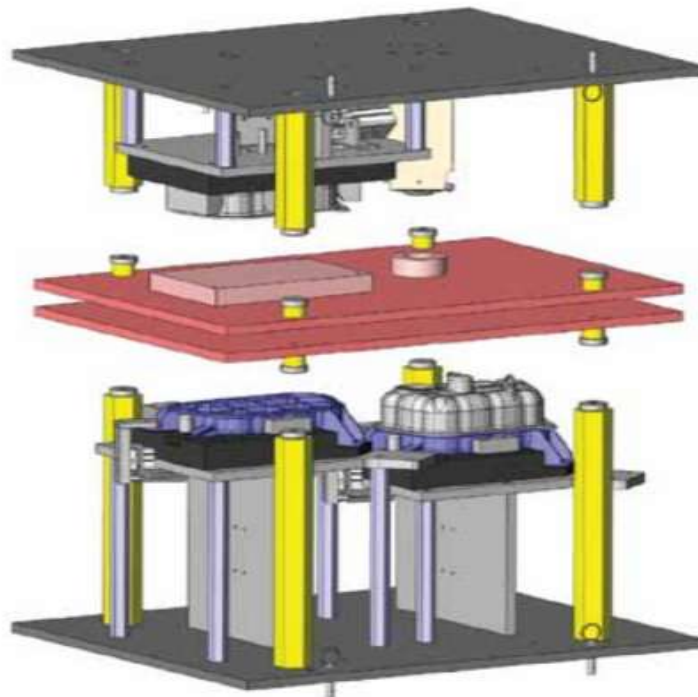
Traditional hot-plate weld tooling depicting a two-place set assembling two halves of a Tank on the left side and a small Fill Neck detail on the right.
